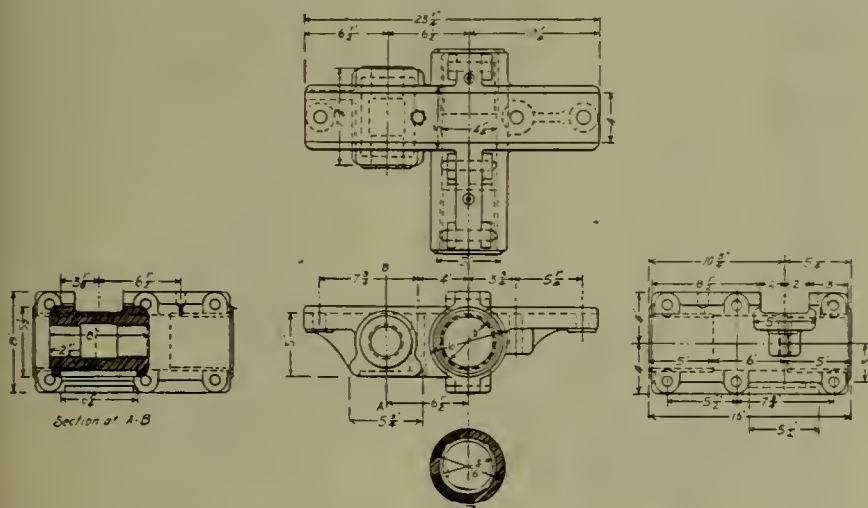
SWITCHING LOCOMOTIVE, CHICAGO, MILWAUKEE & ST. PAUL RAILWAY—DETAILS OF ROCKER BOX.
